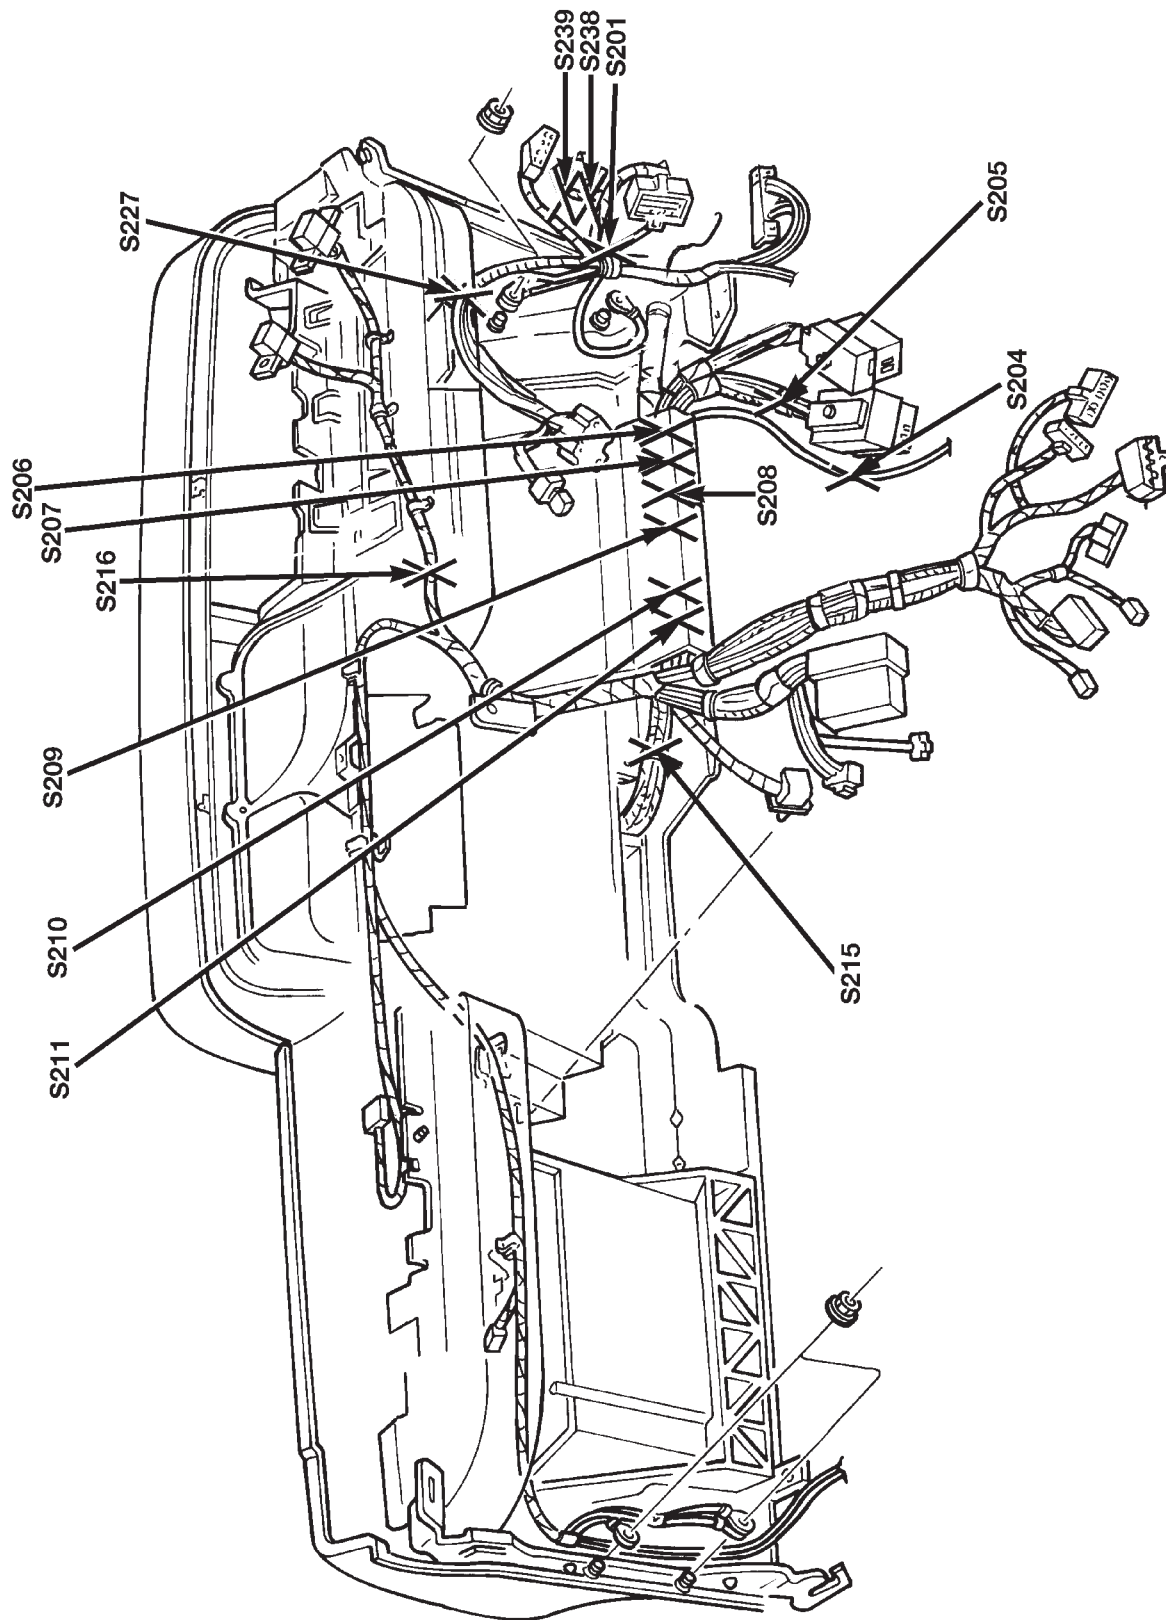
INSTRUMENT PANEL WIRING SPLICES, LHD
